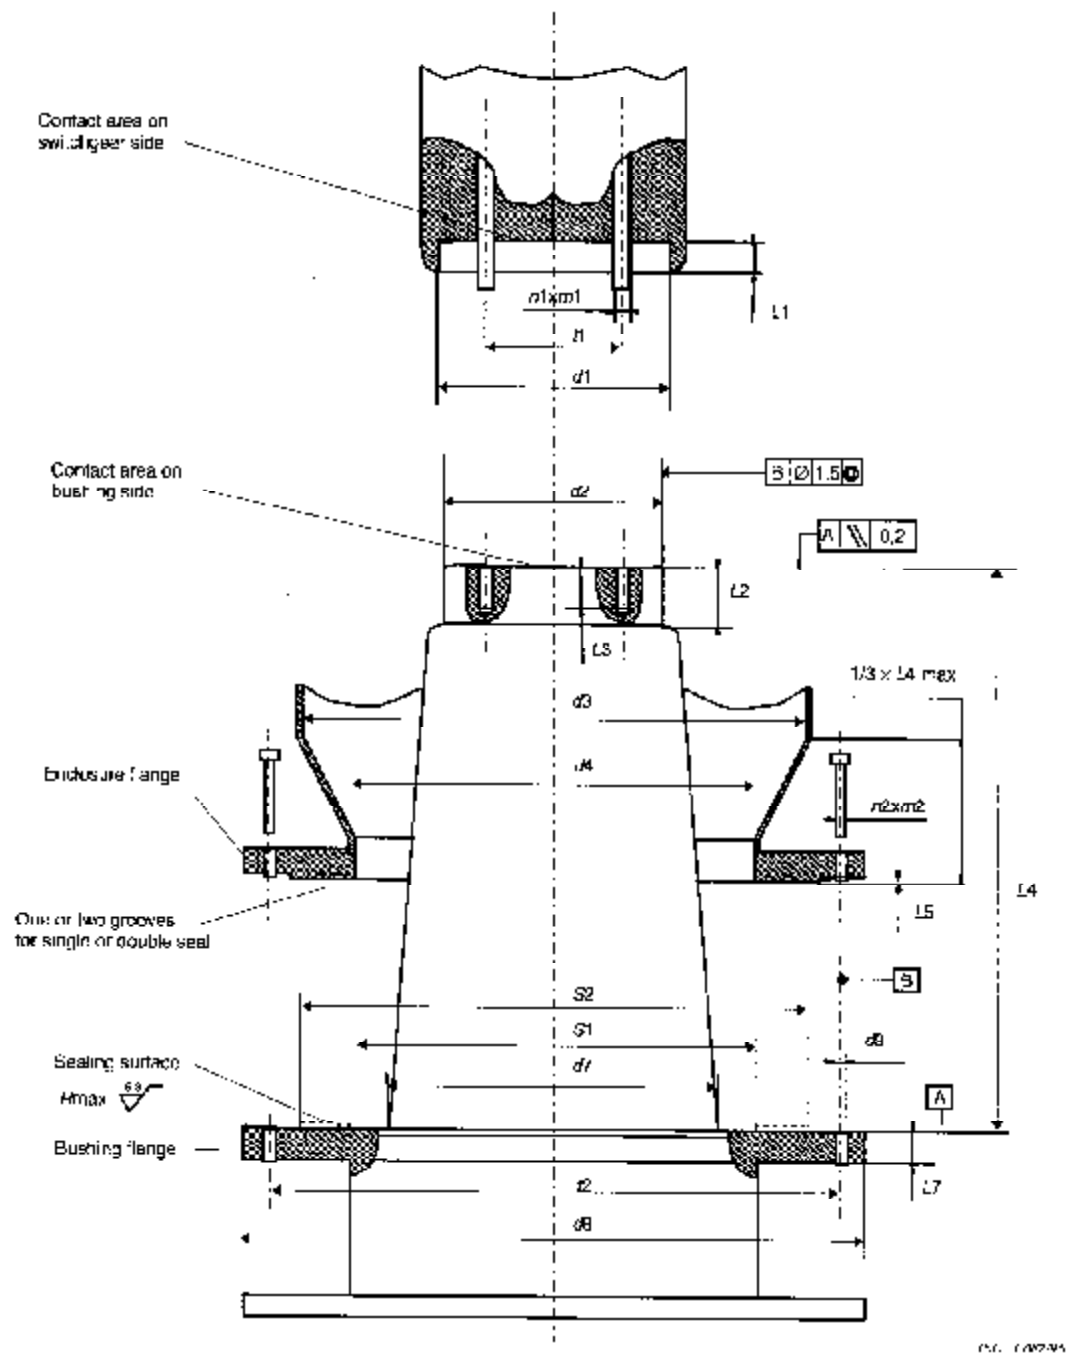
Standard dimensions for typical direct connection between power transformer and gas-insulated metal-enclosed switchgear
